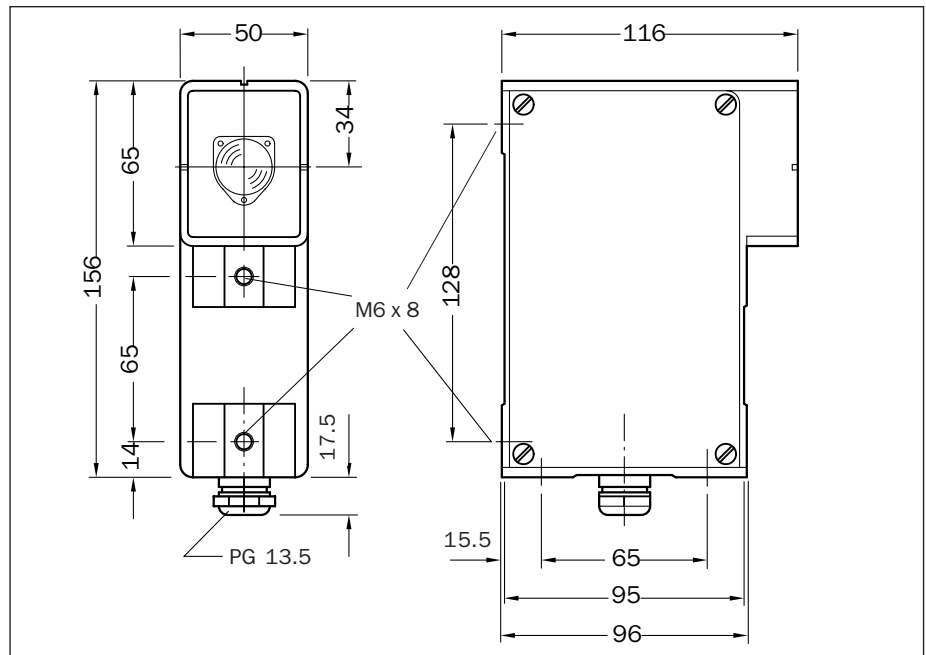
Dimensional Drawing WSU 26/2-xx0 and WEU 26/2-xx0
